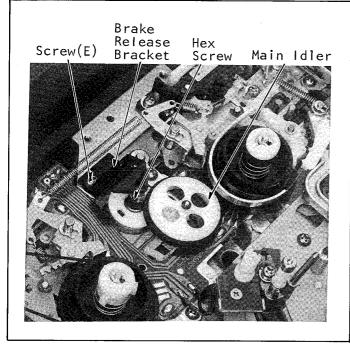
Adjustment of Cam Gear and Mode Select Switch - (11)
